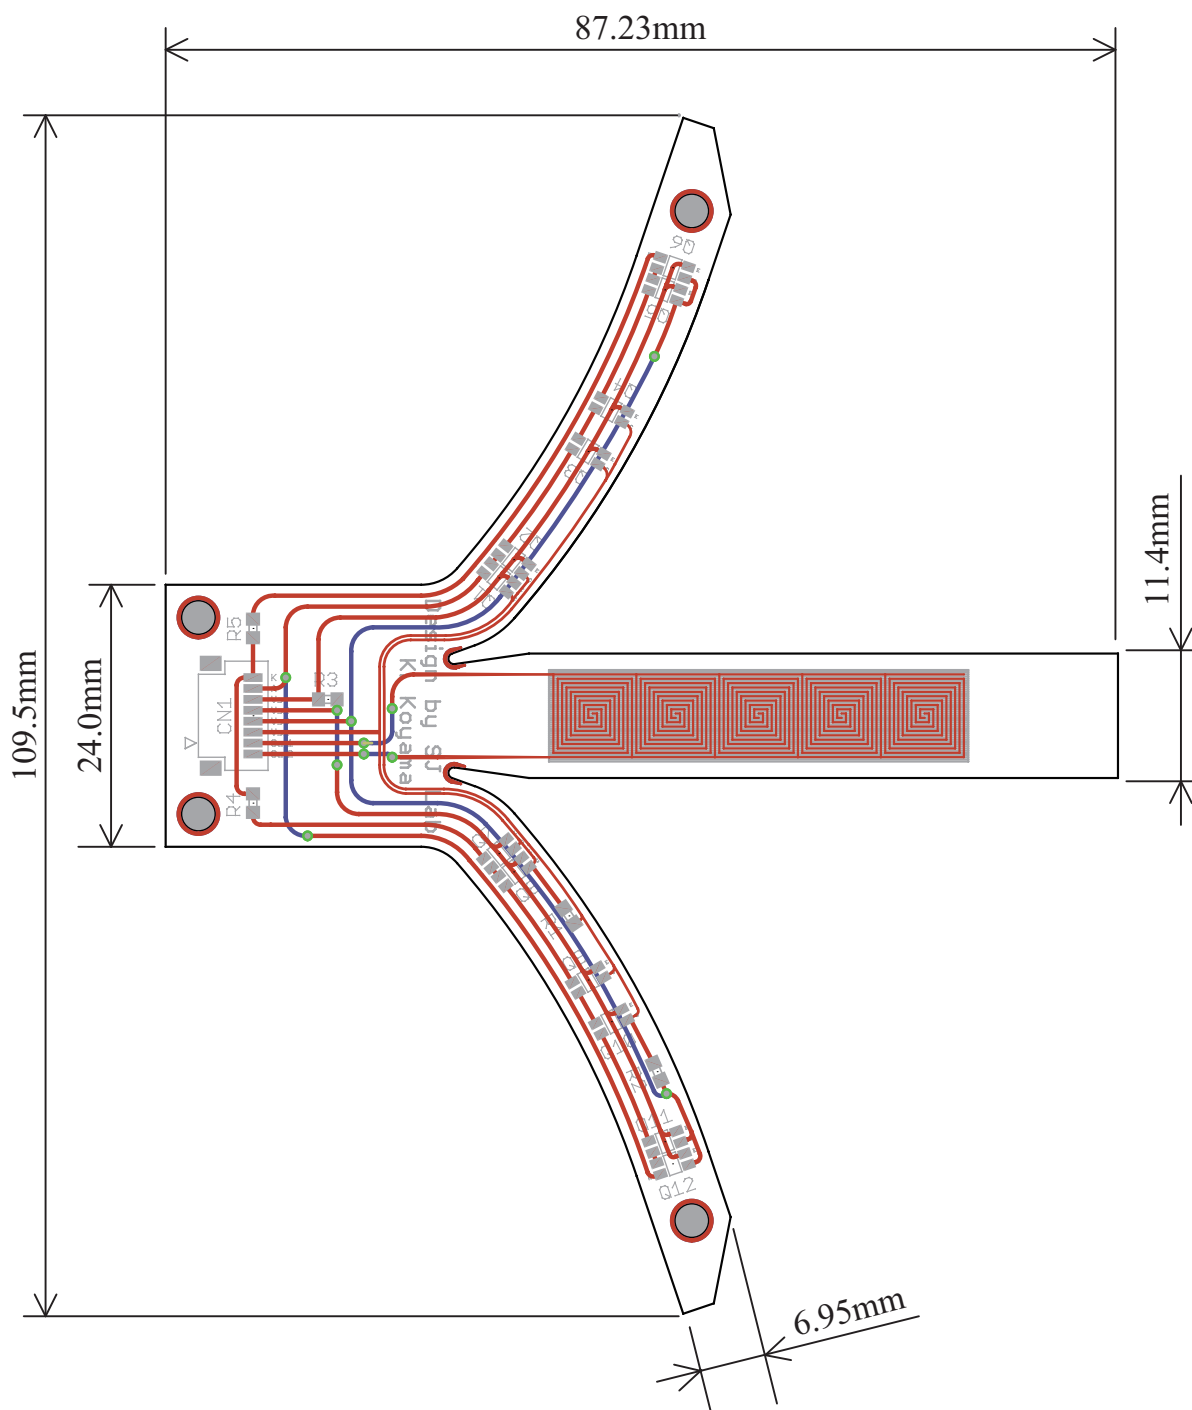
Design drawing of the tactile, slip and the proximity sensor sheet
